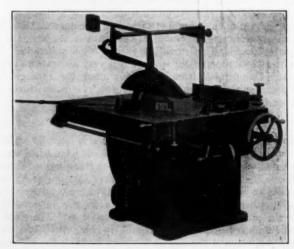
Late Design of Heavy-Duty Engless-Belt Machine—Over-Head Saw
